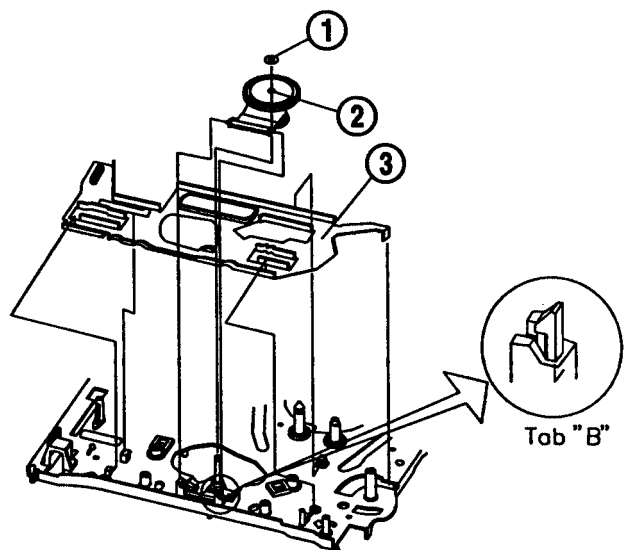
Reel gear total ass'y and Connect Plate Removal
